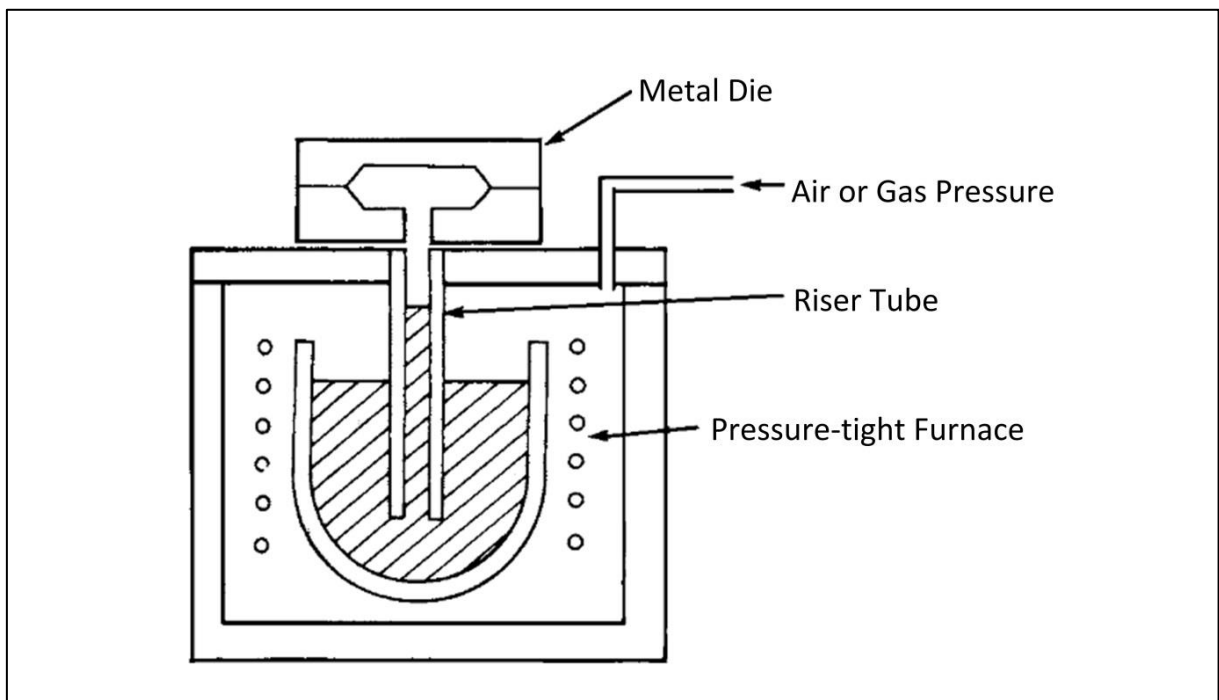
Principle of Low-Pressure Die Casting¹⁰⁸
